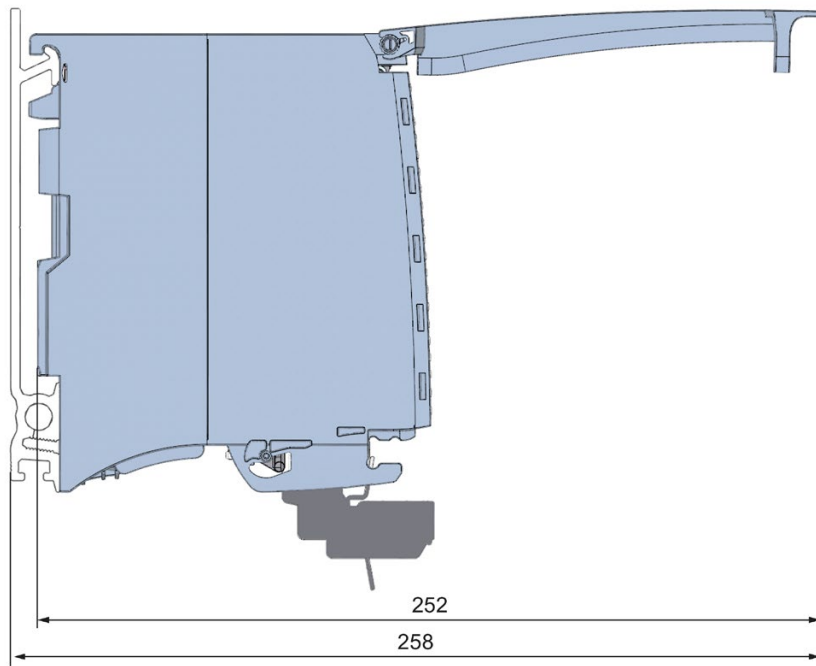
Dimensional drawing of the TM Timer DIDQ 24x24V module, side view with open front panel
